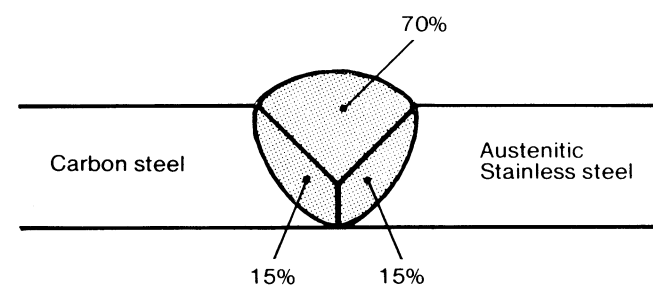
Normal Dilution (30%) for a Butt Weld made by MIG Welding
